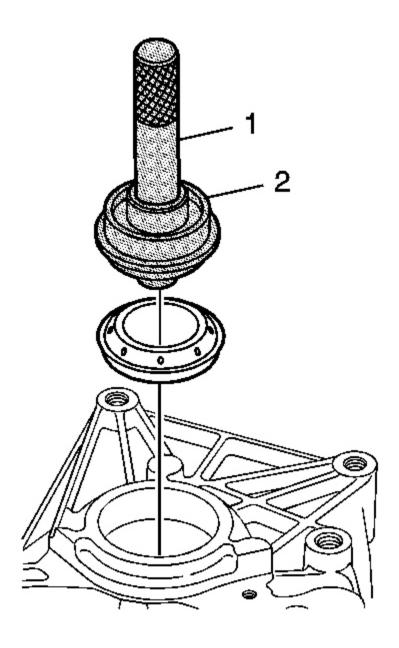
Differential Output Shaft Seal, Clutch Housing, J 44385 & J 8092 Courtesy of GENERAL MOTORS CORP.
